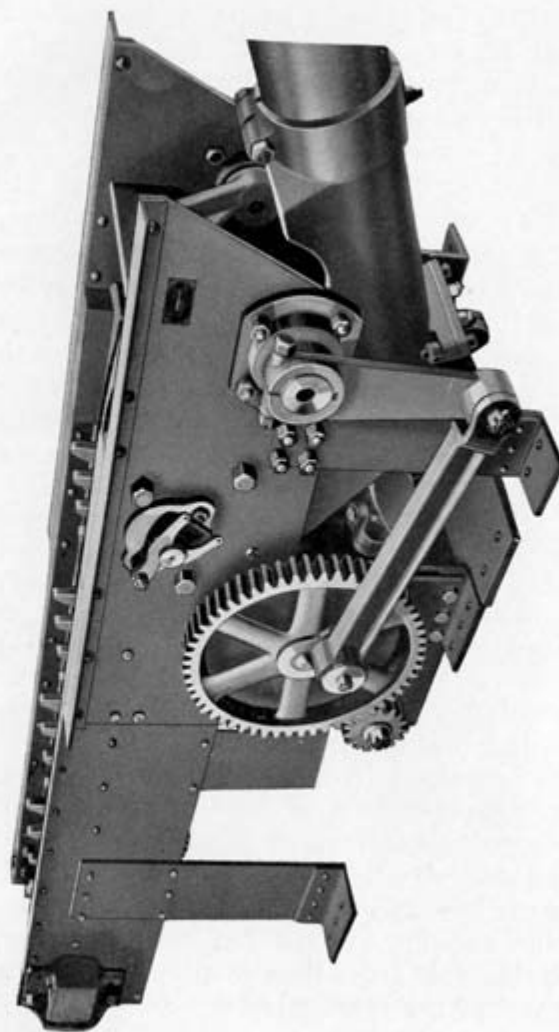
Crusher and feeder, showing crusher arm and driving gear
